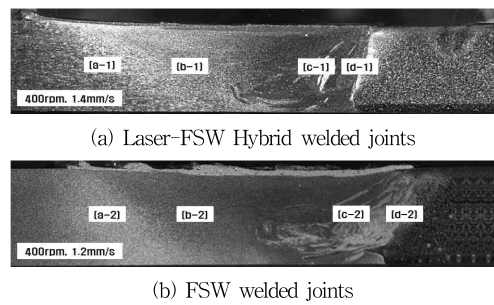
Cross-sectional macrostructures of Laser-FSW hybrid and FSW welded joints
